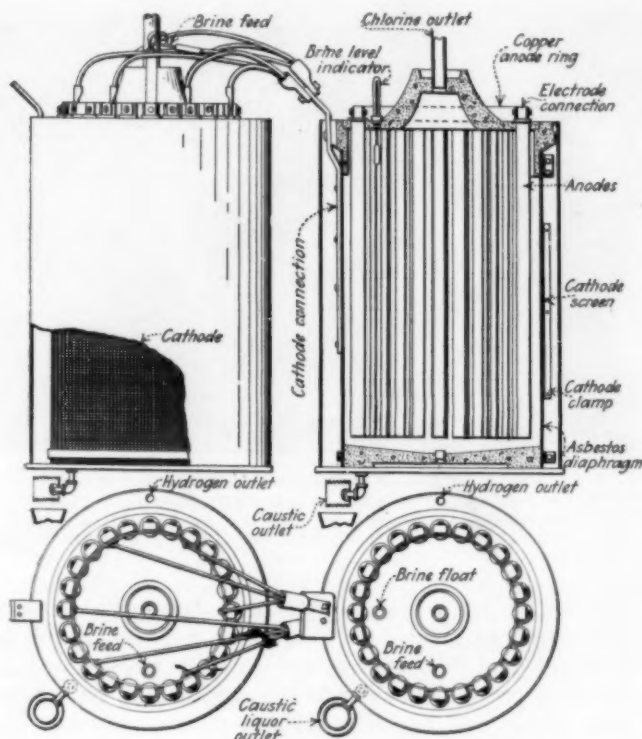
Elevation, Cross-Section and Plan Views of Vorce Cylindrical Cell
